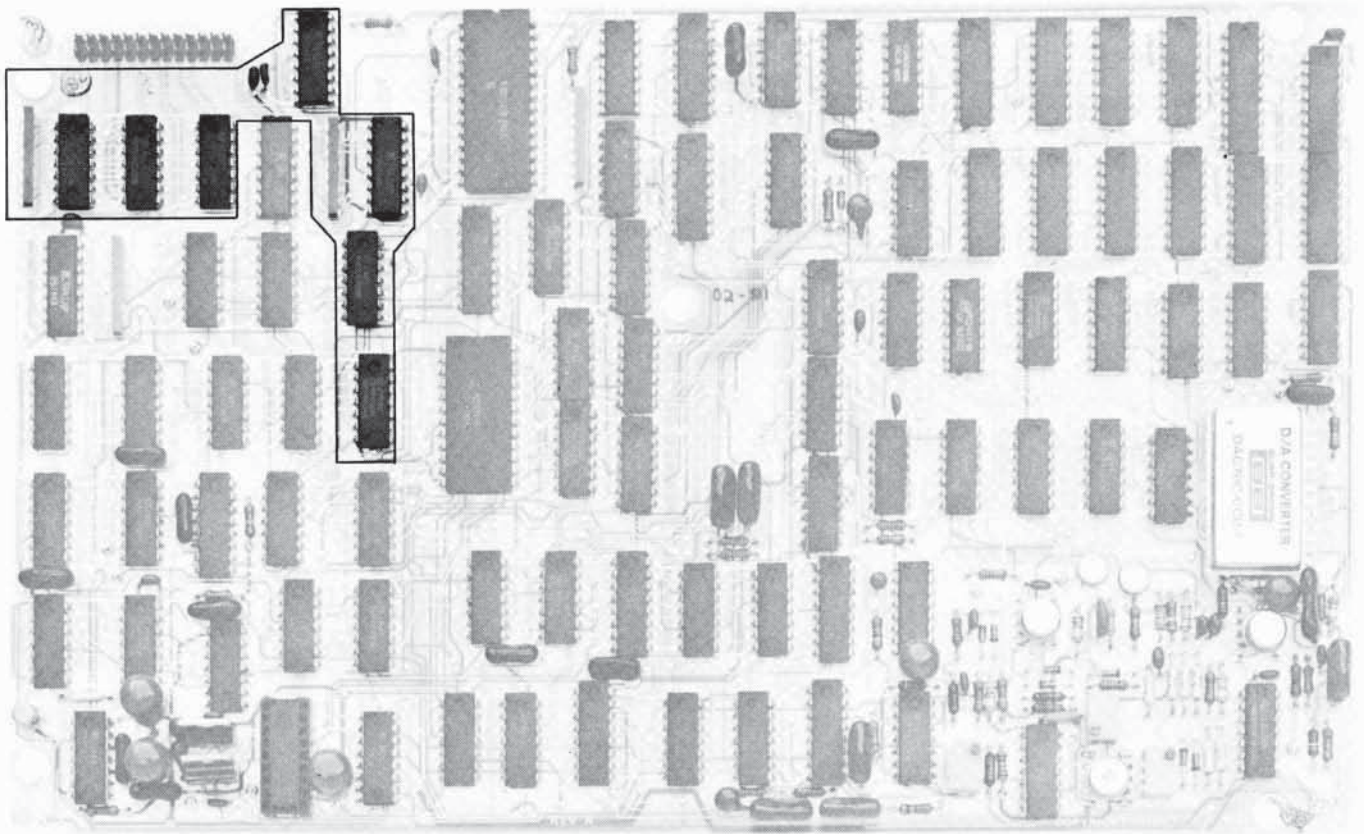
GPIB Interface (A6) PCB Address Recognition Circuit Parts Locator Diagram
